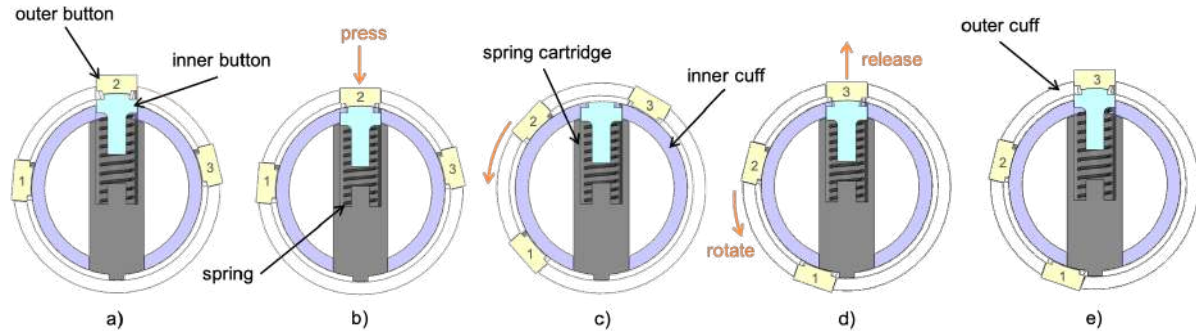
Transverse section through the wrist demonstrating the rotating wrist mechanism. Subfigures show: (a) 0° locking position, (b) button press, (c) outer cuff rotation, (d) button release, and (e) 85° locking position.
